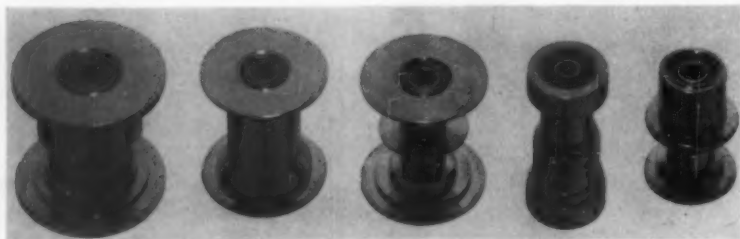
Unicorn Engineering Corp. precision film rollers.
